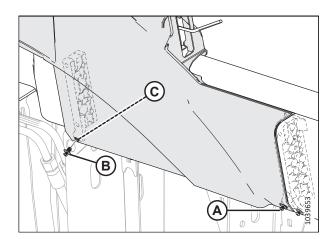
Right Outboard Linkage Cover – View from Rear of Header
